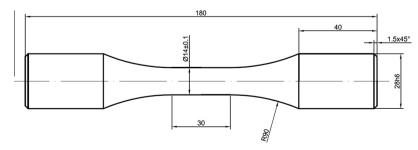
Specimen geometry used for tests of the 30CrNiMo8 steel [33,34].
